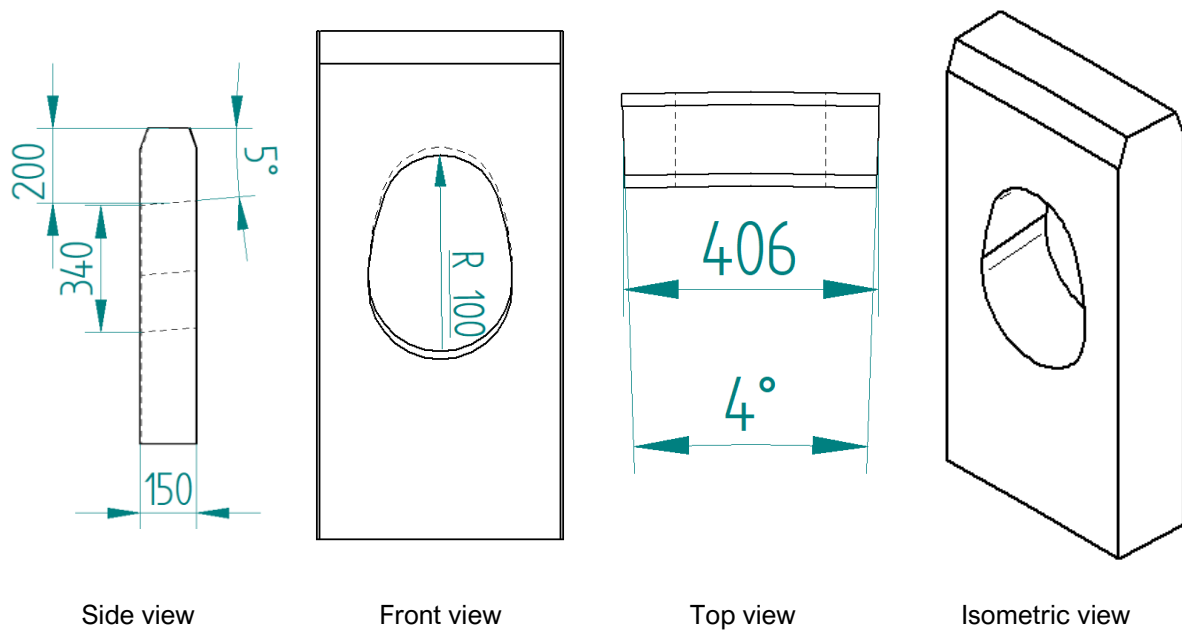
Dimensions of the LF (all dimensions in mm)
